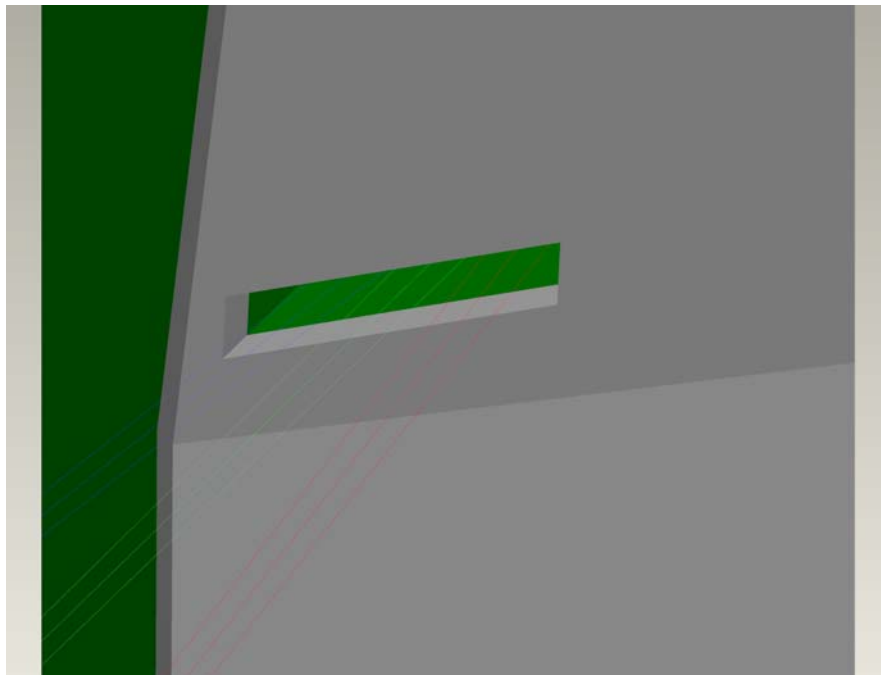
Closeup of the penetration in the blanket shield module for the core system
